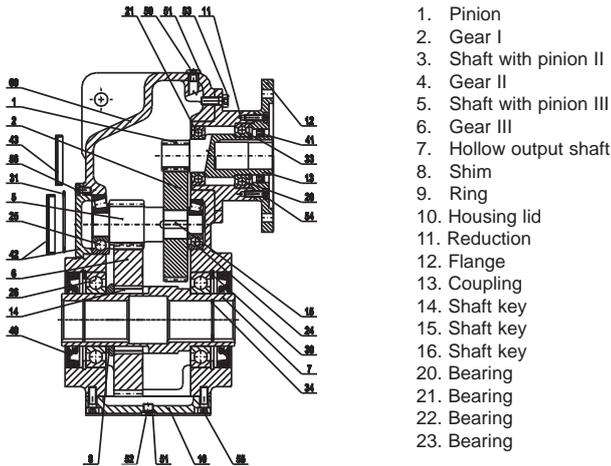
/2 Spare parts-Spur gearboxes ATC
